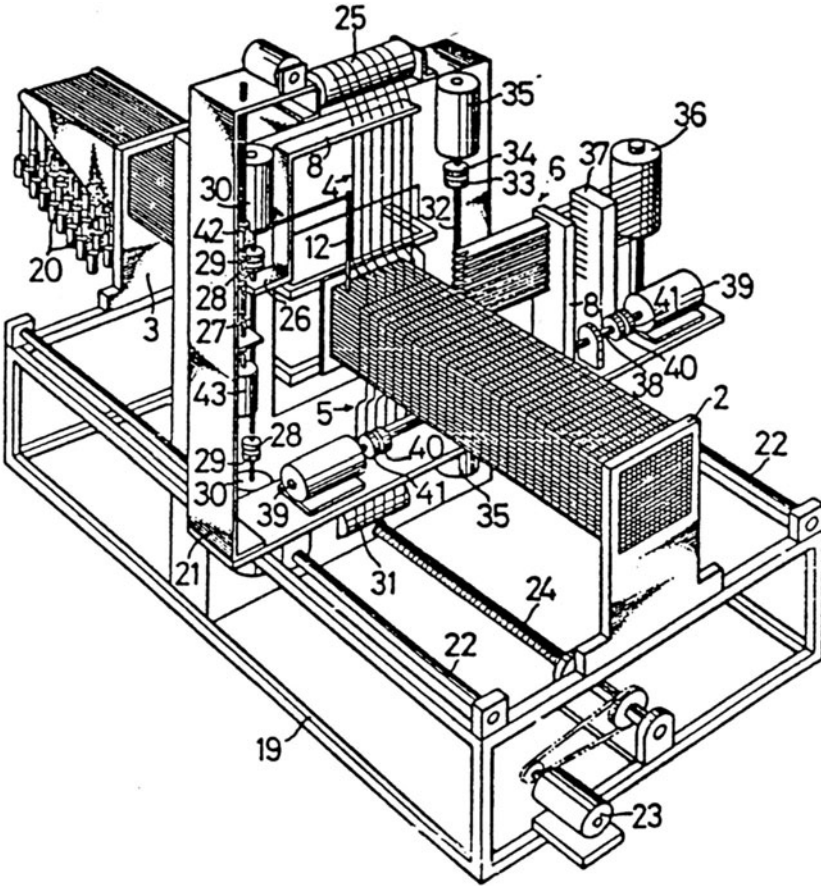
Fukuta's 3-D Billet Manufacturing Machine
